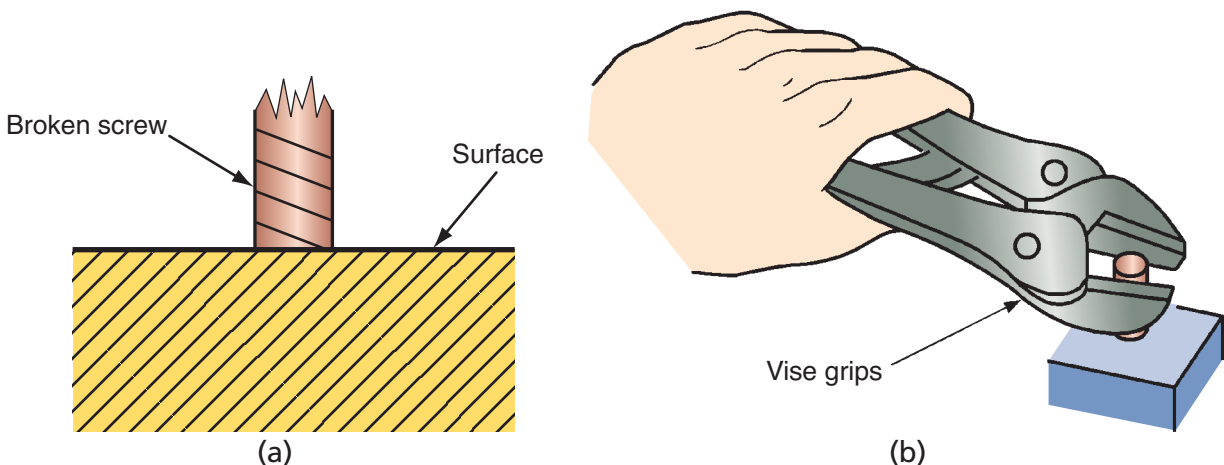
(a) In most cases, a bolt that has broken off above the surface can be removed more easily than one that has been broken off flush. (b) Using a vise grip wrench can be used to remove fasteners that have broken off above the surface.
